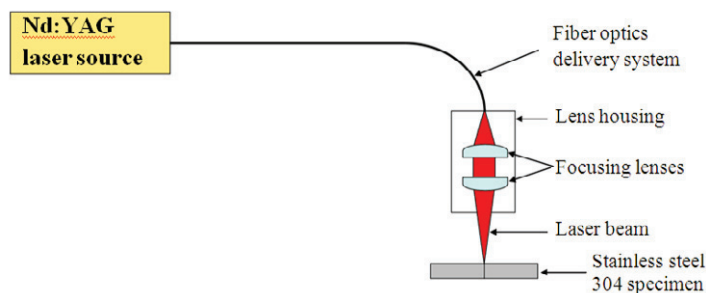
Nd:YAG laser experimental setup to produce a spot weld on stainless steel 304 specimen.
